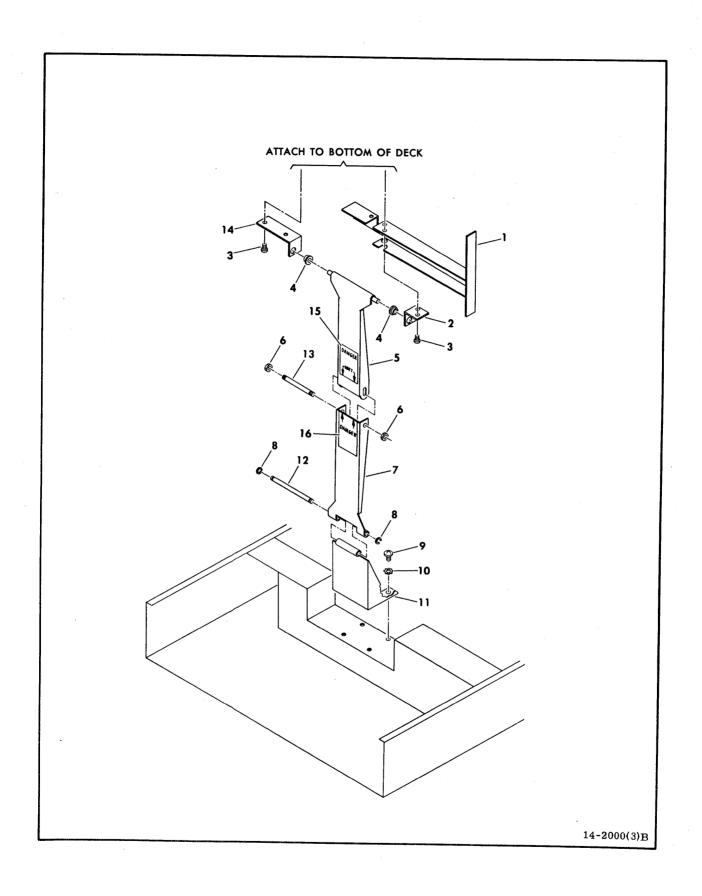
Drive Electronics Assembly (Sheet 3) S/C 19 & Below W/O FCO 55172
